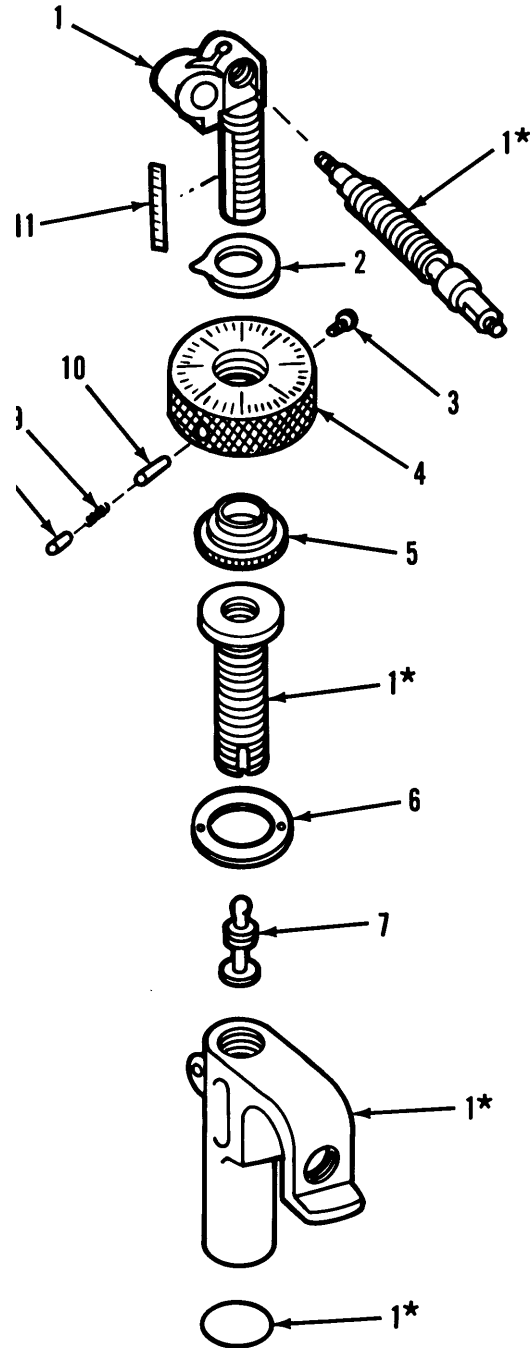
Traversing and elevating mechanism assembly (traversing and clamping unit).
